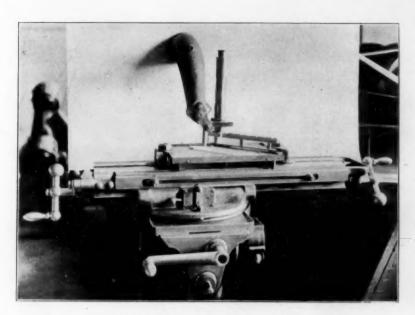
Interpolating Machine on bed of Milling Machine.
